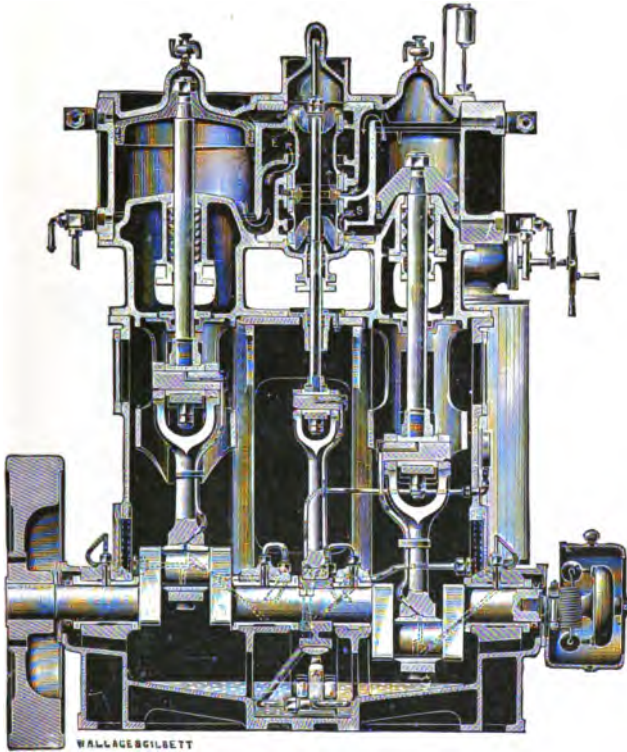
Sectional Elevation of Belliss & Morcom Engine
